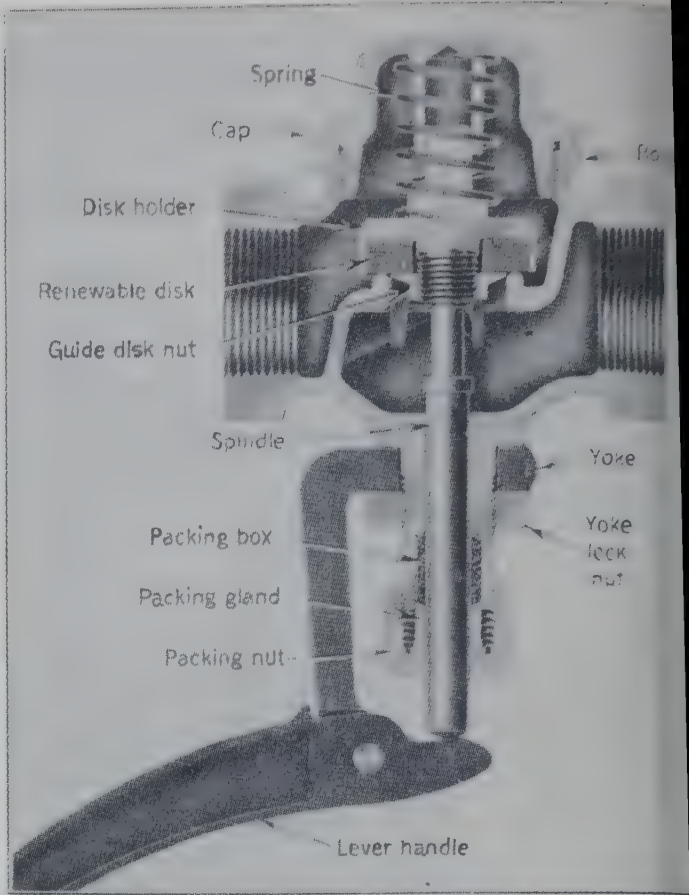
Quick-opening globe valve (sectional view) (Jenkins Bros.)
